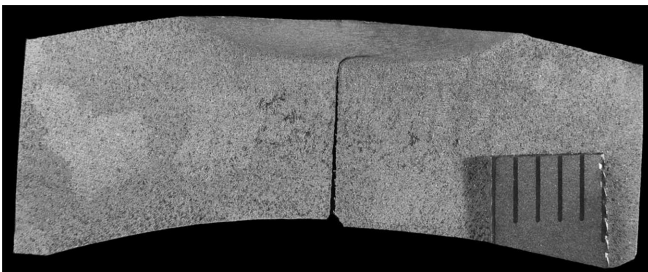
FSW weld structure. Welding using a tool without a probe. Welding parameters: no. 1 of Table 4
